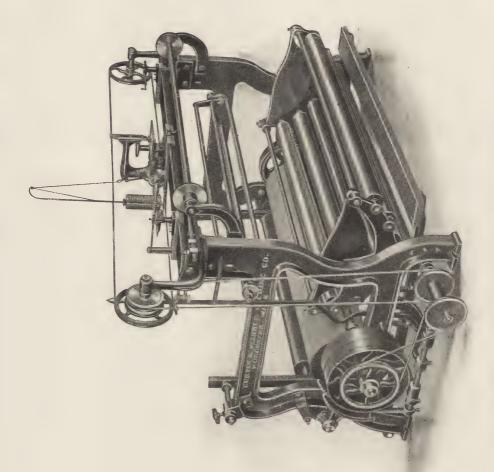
Windle's Doubling, Winding and Measuring Machine.
